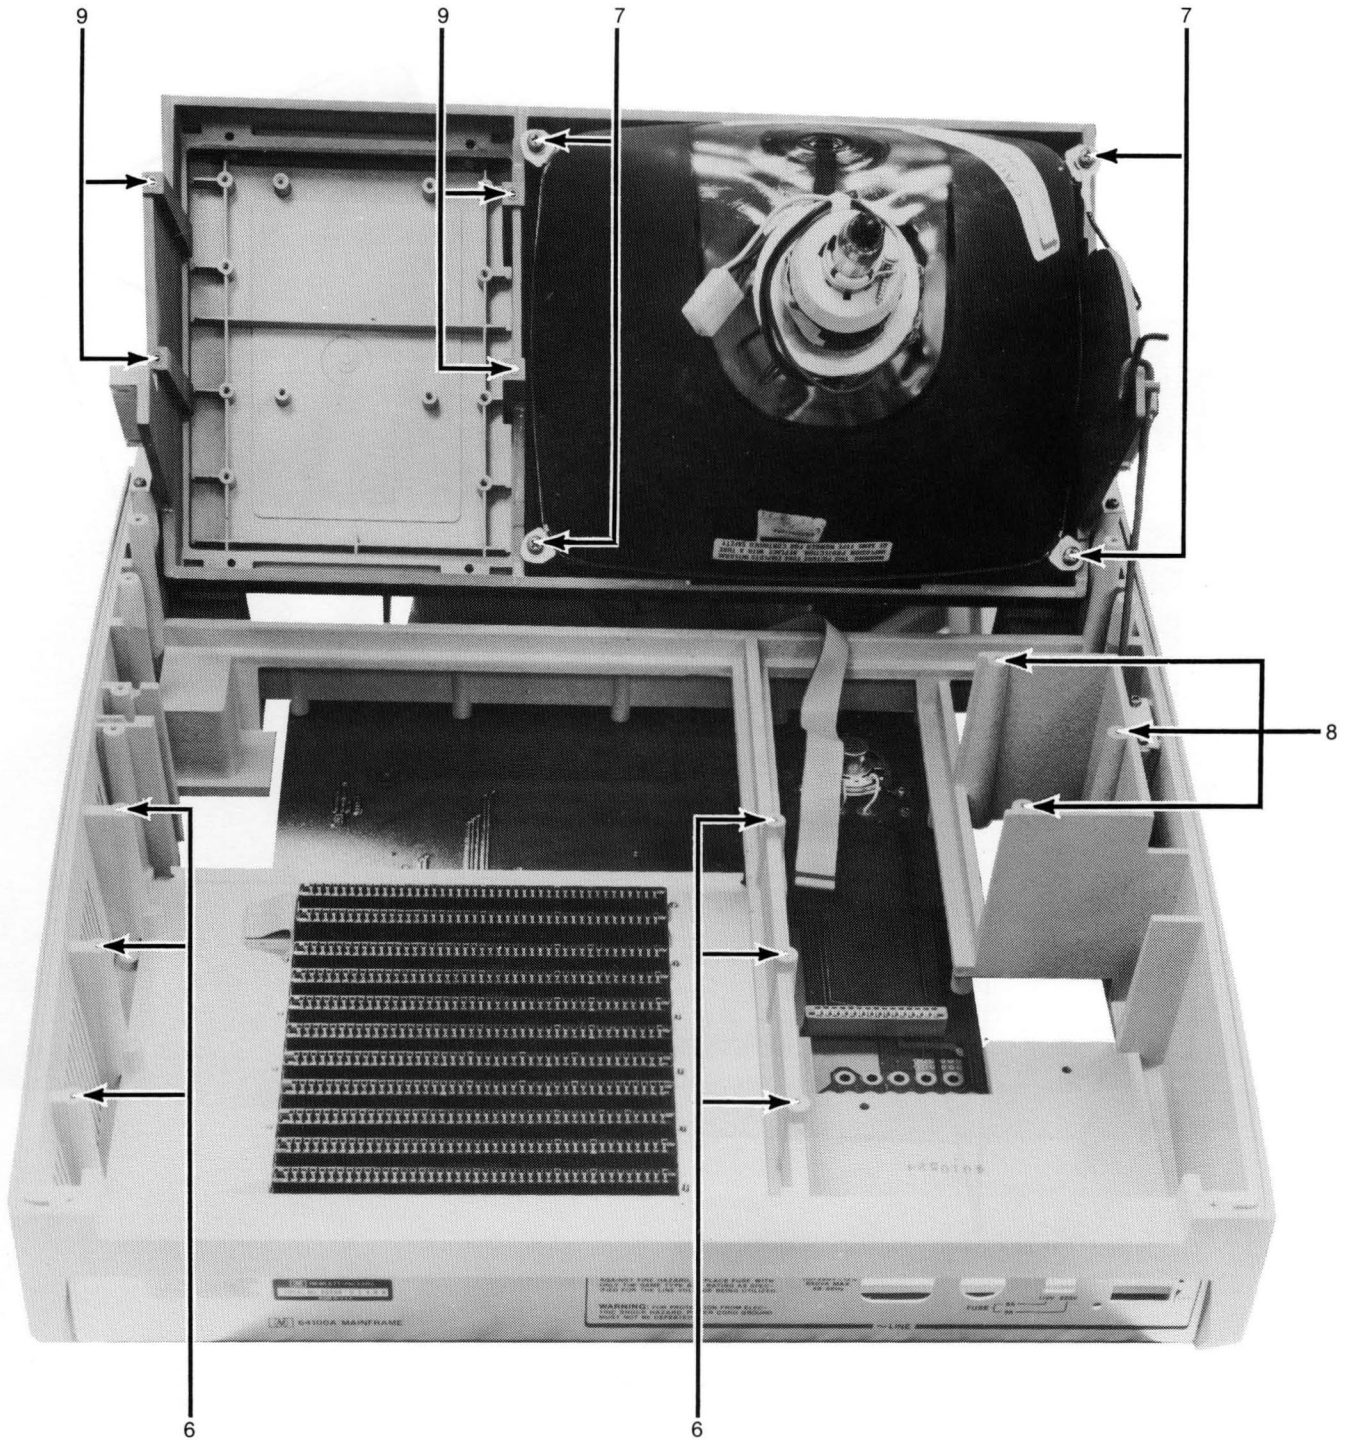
Mainframe Attach Screw Locator (Sheet 5 of 7)
